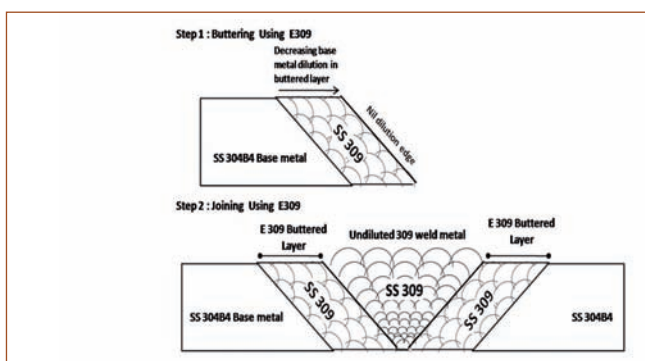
Schematic representation of modified welding procedure adopted for welding 304B4 SS using E309 electrode
